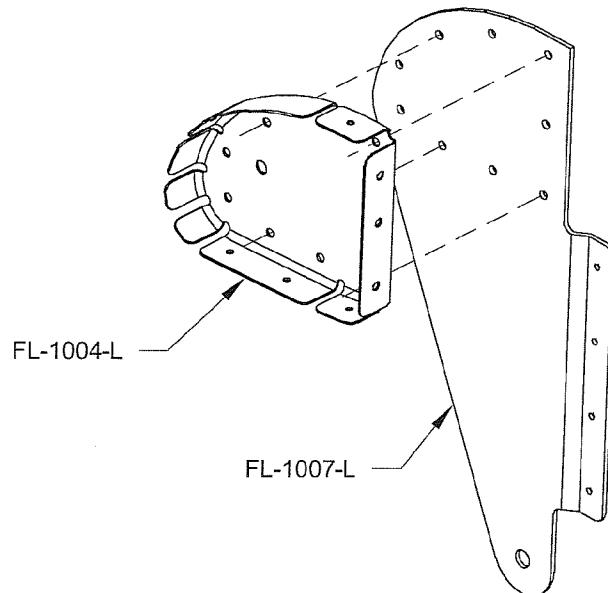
LEFT HINGE PAIR RIB SUBASSEMBLY
